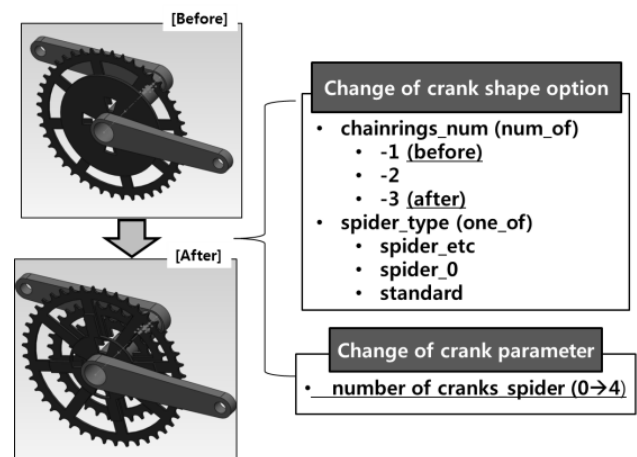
Experiment of 3D CAD part model modification for a crank part using the part shape information model
